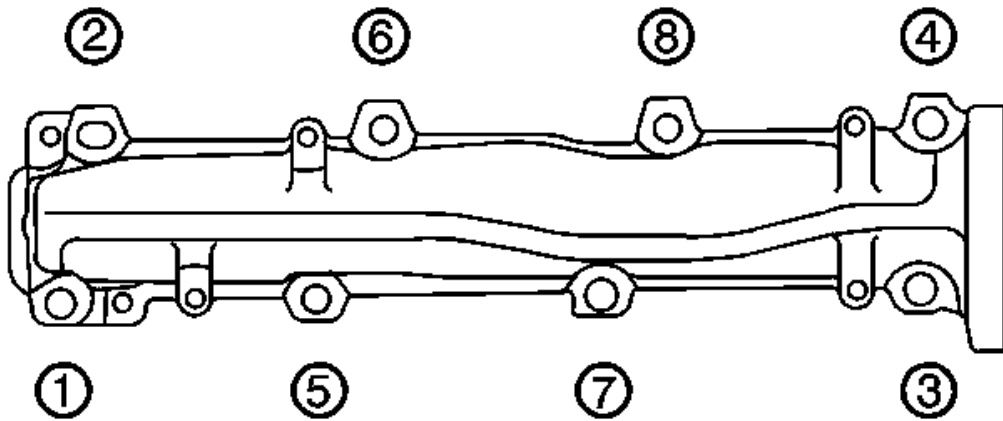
Left Exhaust Manifold Bolts & Nuts Removal & Installation Sequence
